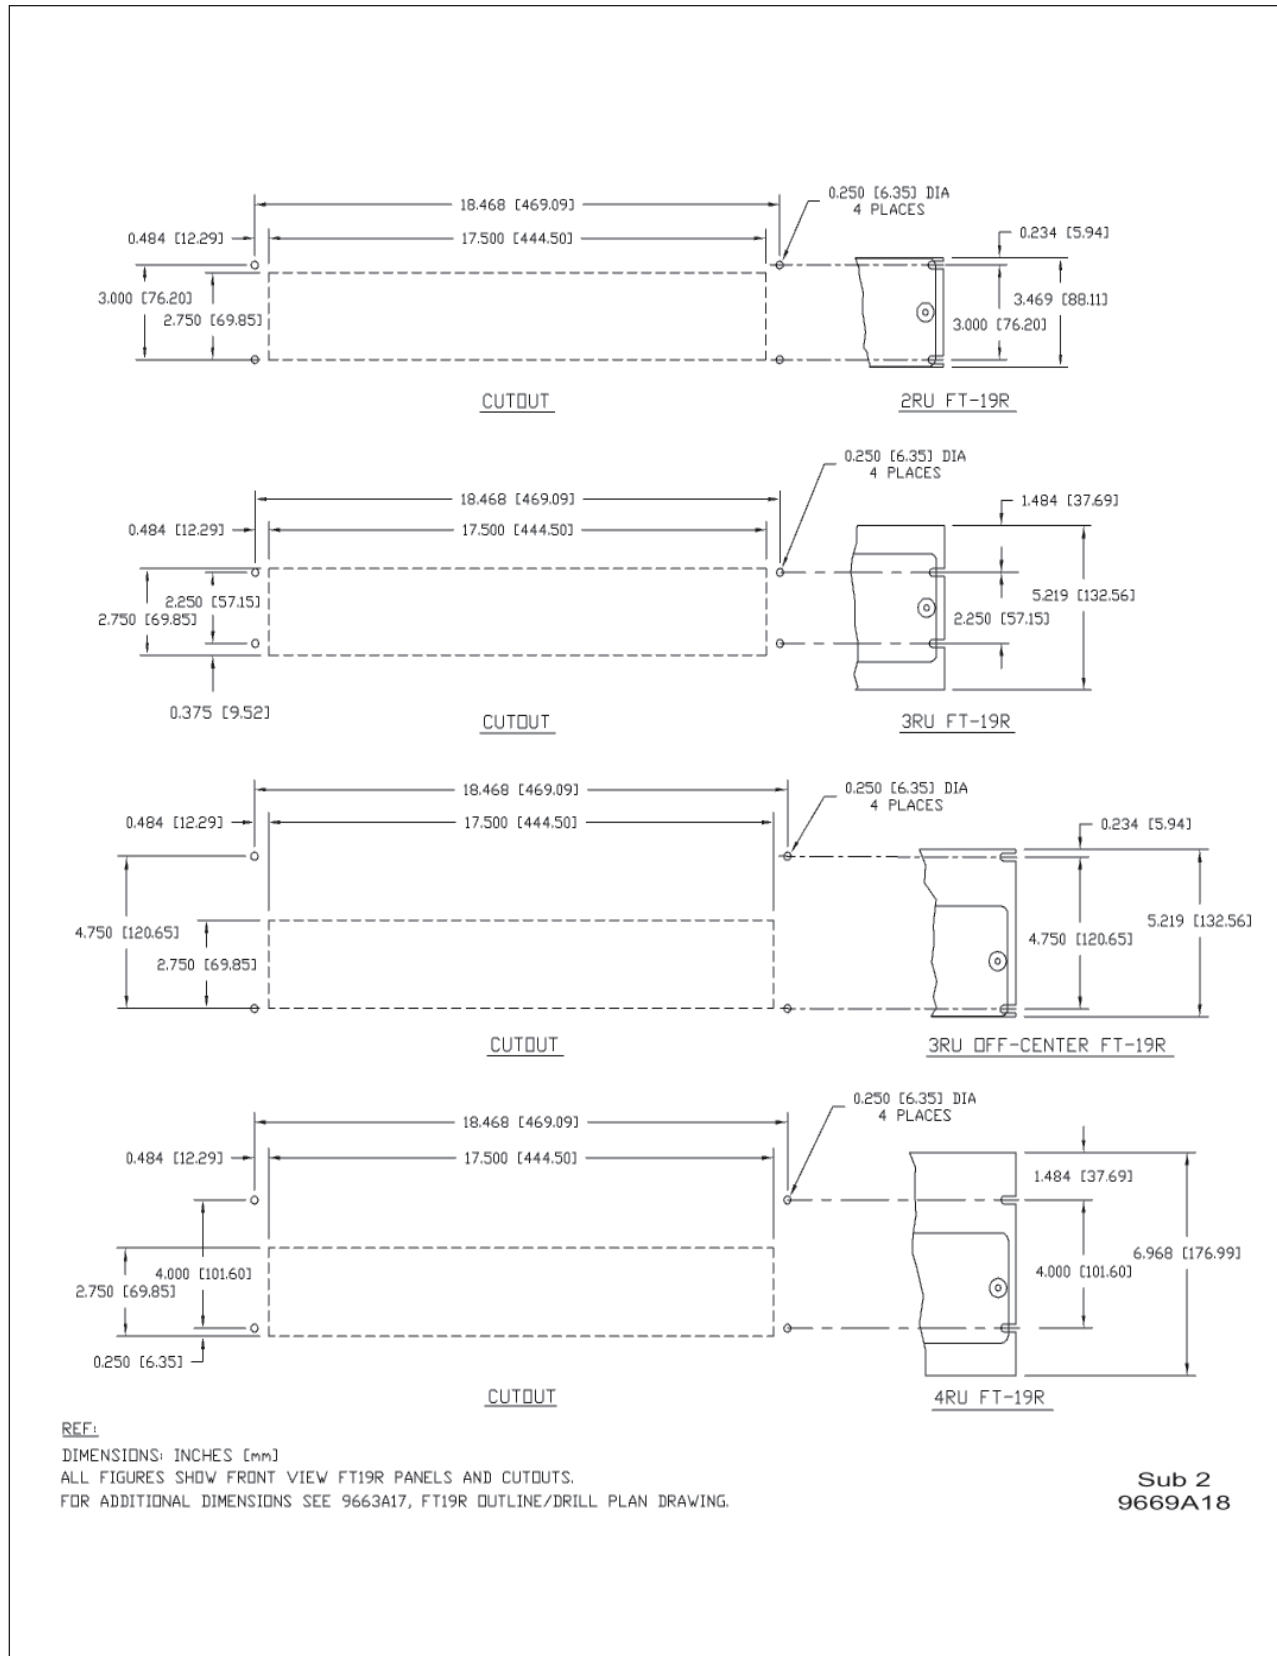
Outline and drilling plan for FT-19R with flat panels (no rolled edges), rack or flush mounting for panels or cabinets
